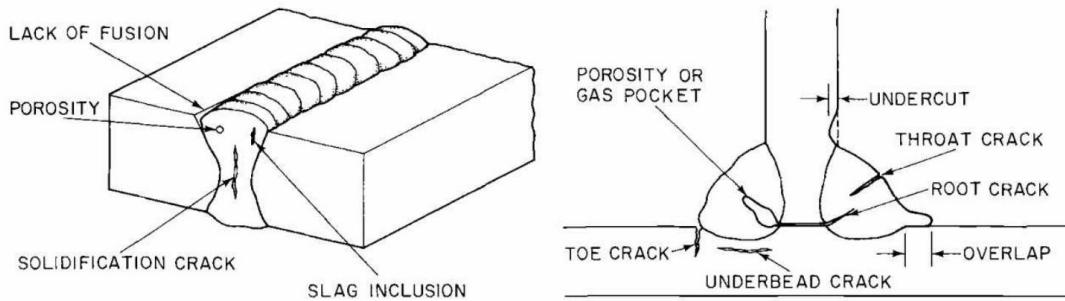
Defects in welded joints (Barsom & Rolfe 1999).
